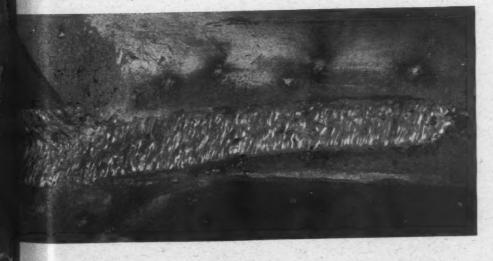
Bronze weld shown in Fig. 17 viewed from inside of water box. Inlet opening appears at right of repair.
